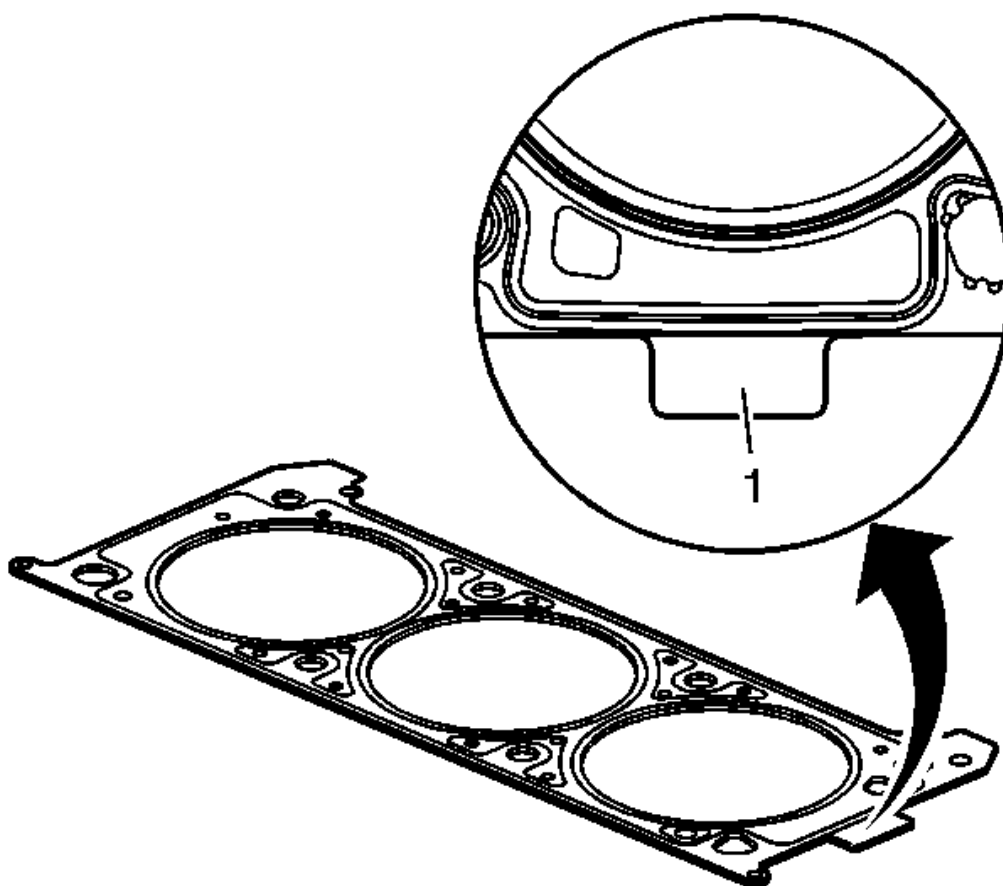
Identifying Proper Cylinder Head Gasket Installation
